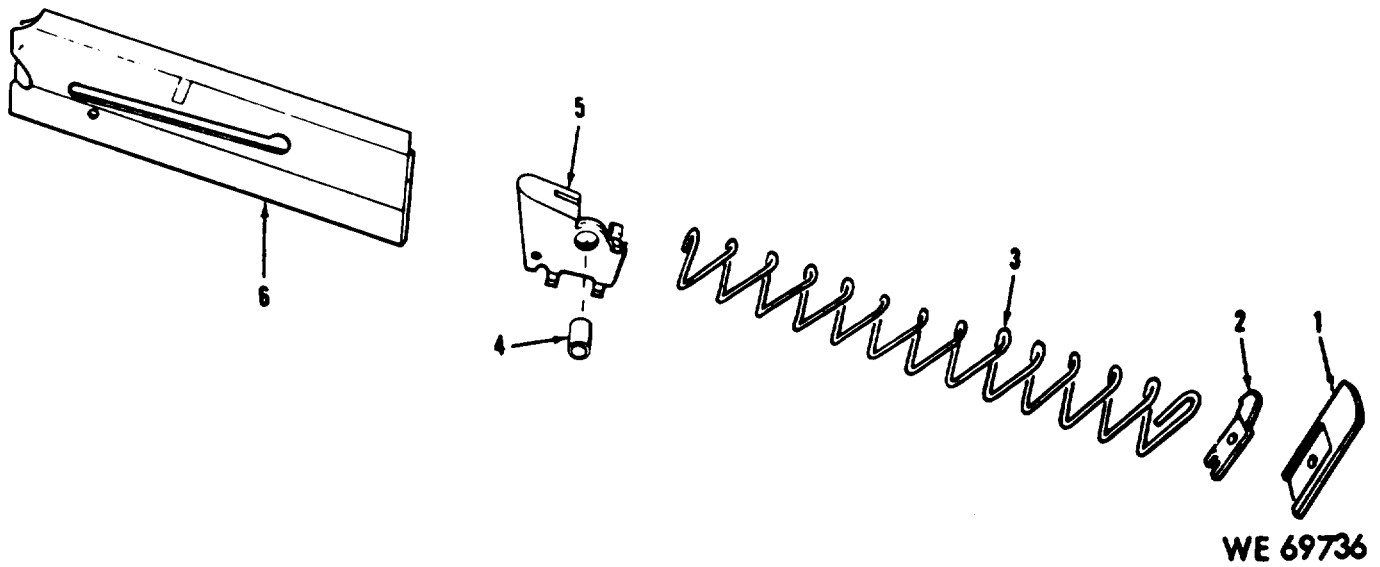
Magazine assembly for Model 52 Smith and Wesson cal. .38 automatic pistol-exploded view.
